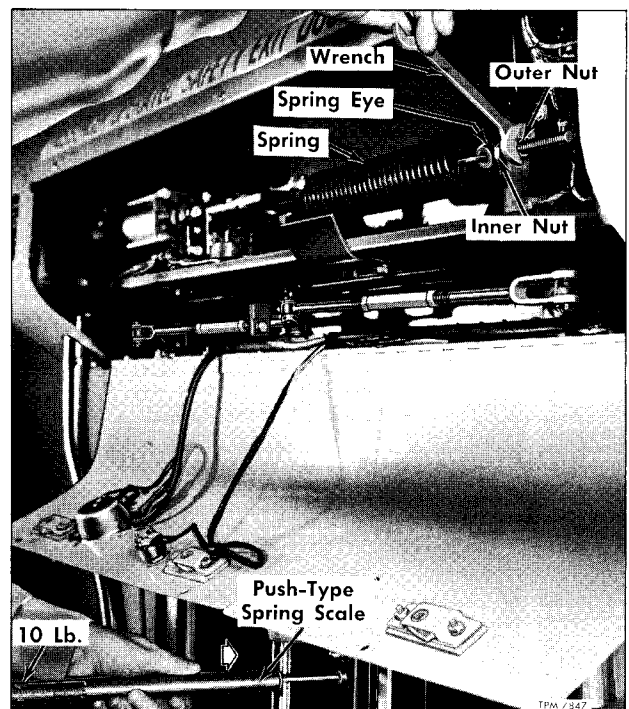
Adjusting Push Type Rear Door Return Spring Tension
